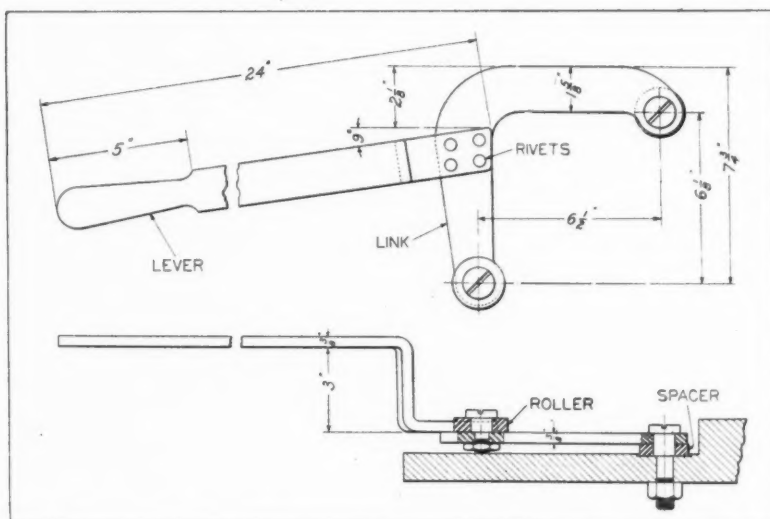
Lever Used to Move Work-holders Shown in Fig. 1 into Successive Machining Positions
